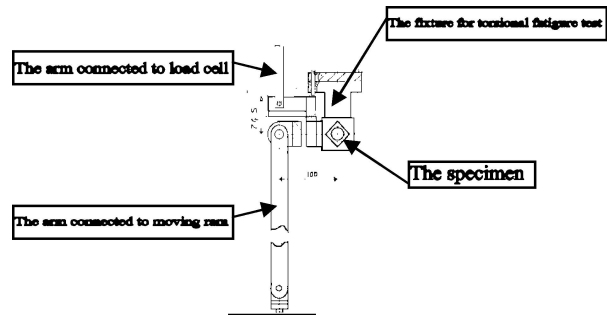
The arms of the fixture connected to the moving ram and load cell of a DARTEC tensile testing machine.
